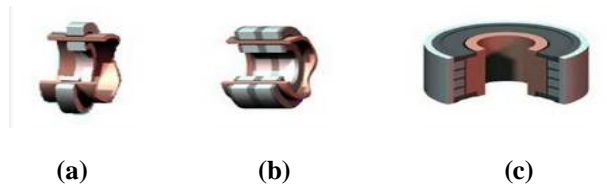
Different types of permanent magnetic bearings (a) Single row intermediate bearing for hollow shafts (b) Double row intermediate bearing for hollow shafts (c) Quad row external magnet bearing for solid shafts[7]
